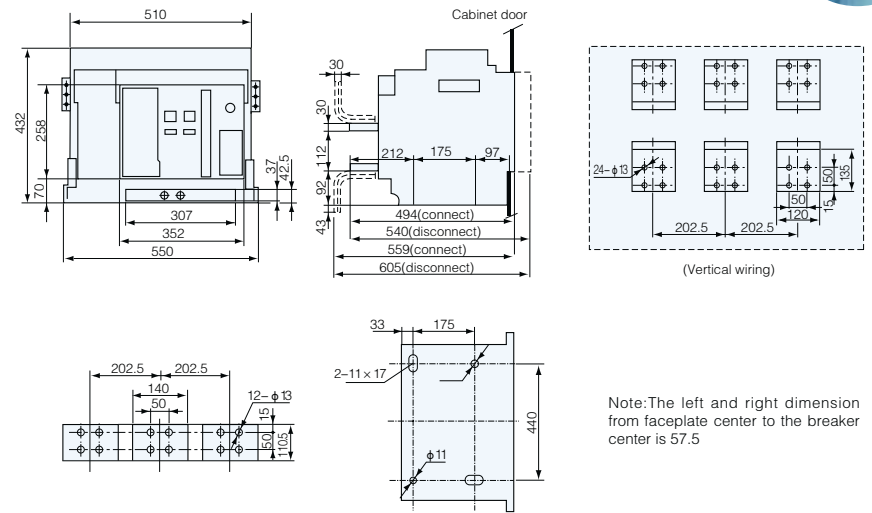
overall and mounting dimensions of drawer type breaker (OW18-4000)
